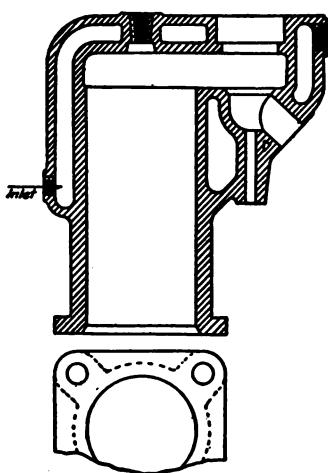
Water Cooled, Four Cycle Cylinder.
